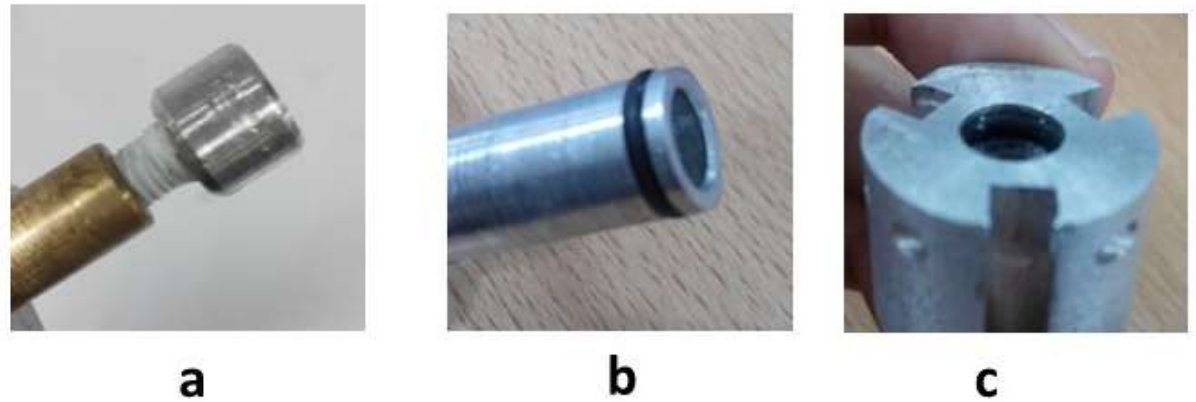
Showing the sealing mechanism, (a) Teflon tape attached to prevent water leakage, (b) O-rings attached to outer surface, (c) O-rings attached to inner surface.
